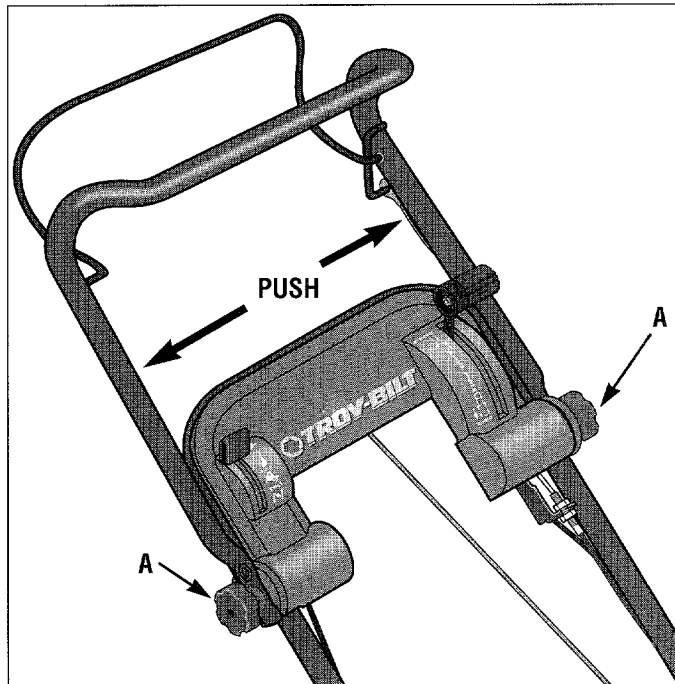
Handlebar Position Adjustment Knobs (Model 34322 shown).
